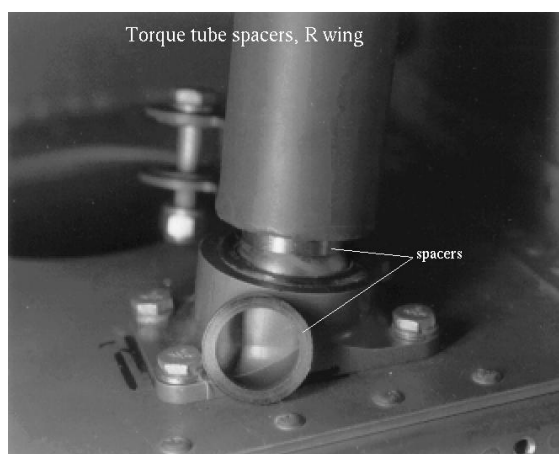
You will probably have to install spacers or shims to insure adequate engagement in both bearings.
